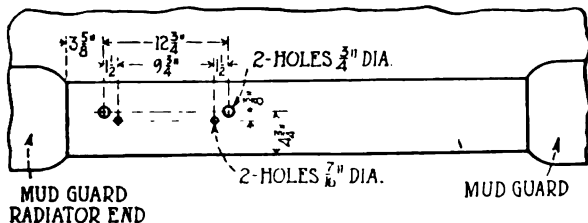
Location of holes on left-hand running board for mounting storage box with improved chain-drive Genemotor
